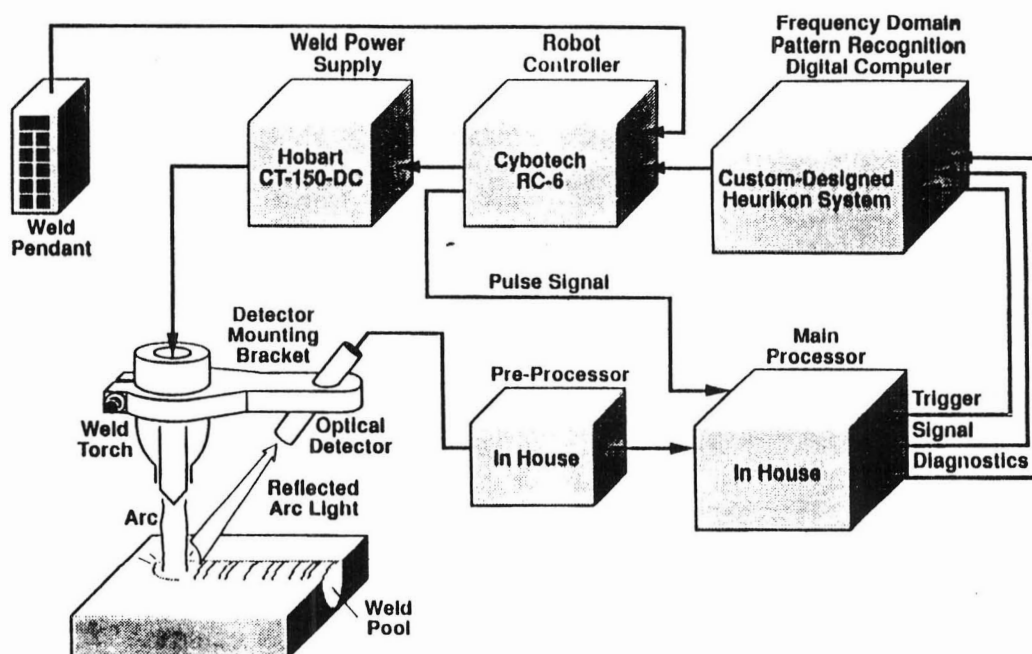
Major Elements of the Optical Weld Penetration Control System
